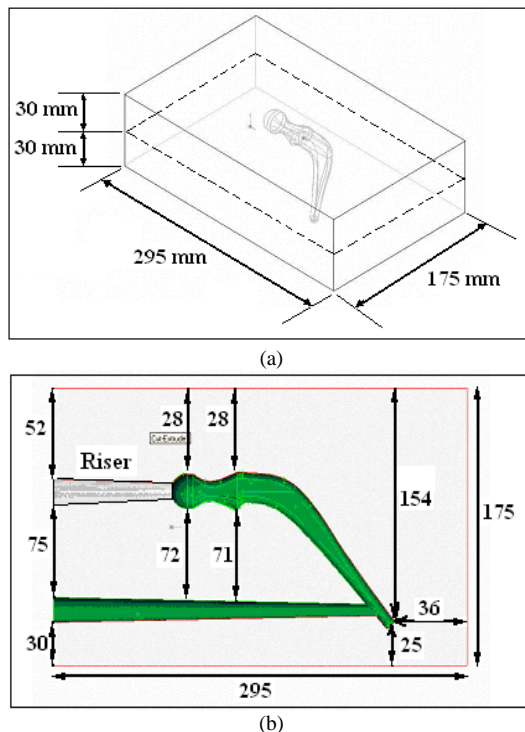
Die halves are in (a) assembled condition, (b) Dimensions of the die cavity with feeder and riser (all are given in mm)
